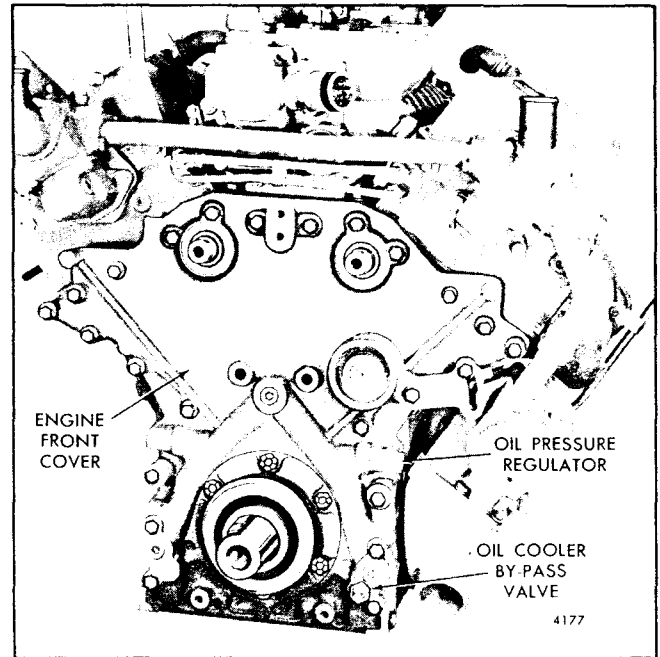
Location of Oil Pressure Regulator (8V Engine)
